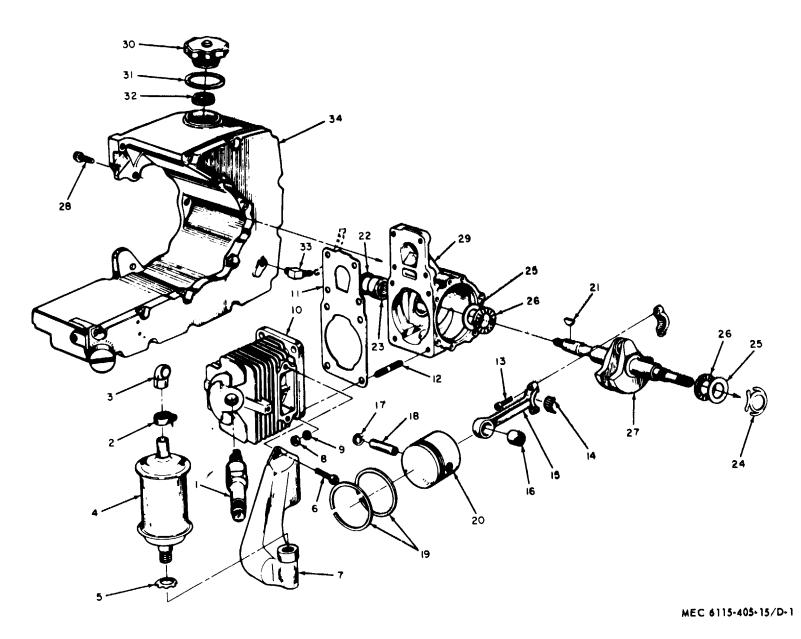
CRANKCASE CYLINDER, CRANKSHAFT AND RELATED PARTS
